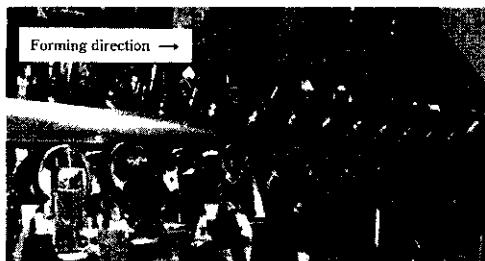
Appearance of strip sheet in cage roll forming zone of CBR forming mill
